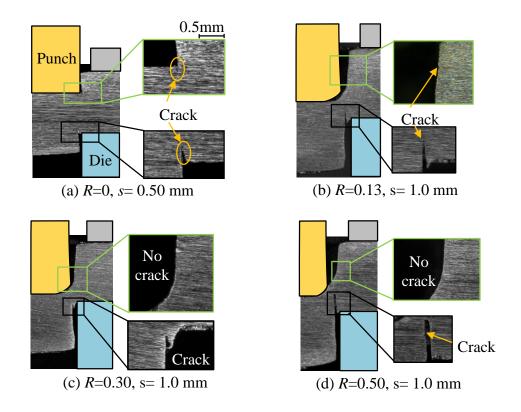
Deformation and shearing behaviour of die-quenched steel sheet for different punch edge radius.
